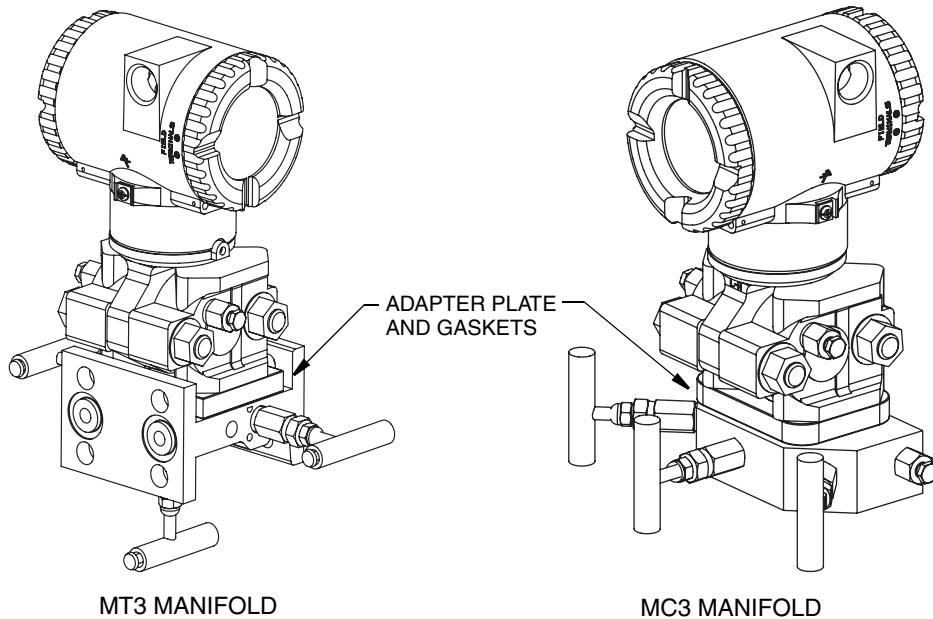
Typical Mounting of IMV25 Transmitter on Coplanar™ Manifold
